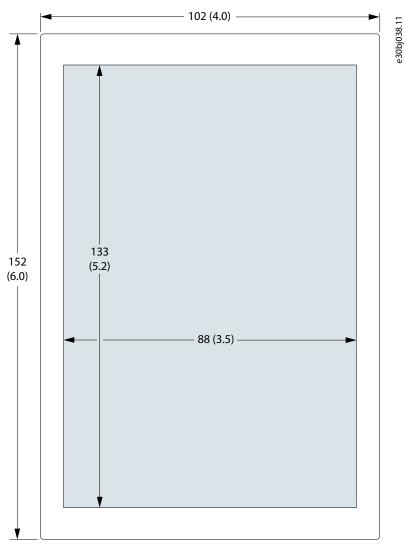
Flush Mounting Drilling Template View from front. Dimensions in mm (in)
